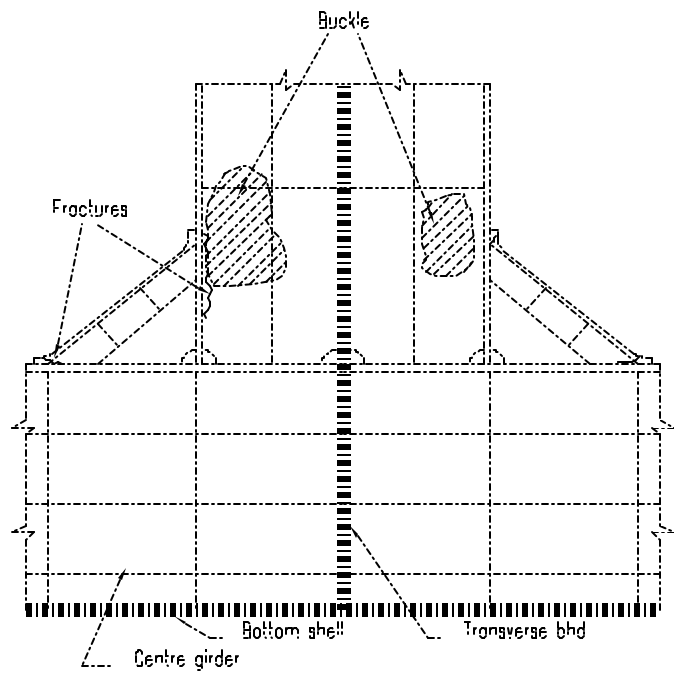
Fractured bottom centre line girder at the end bracket connection to O. T. bulkhead.
